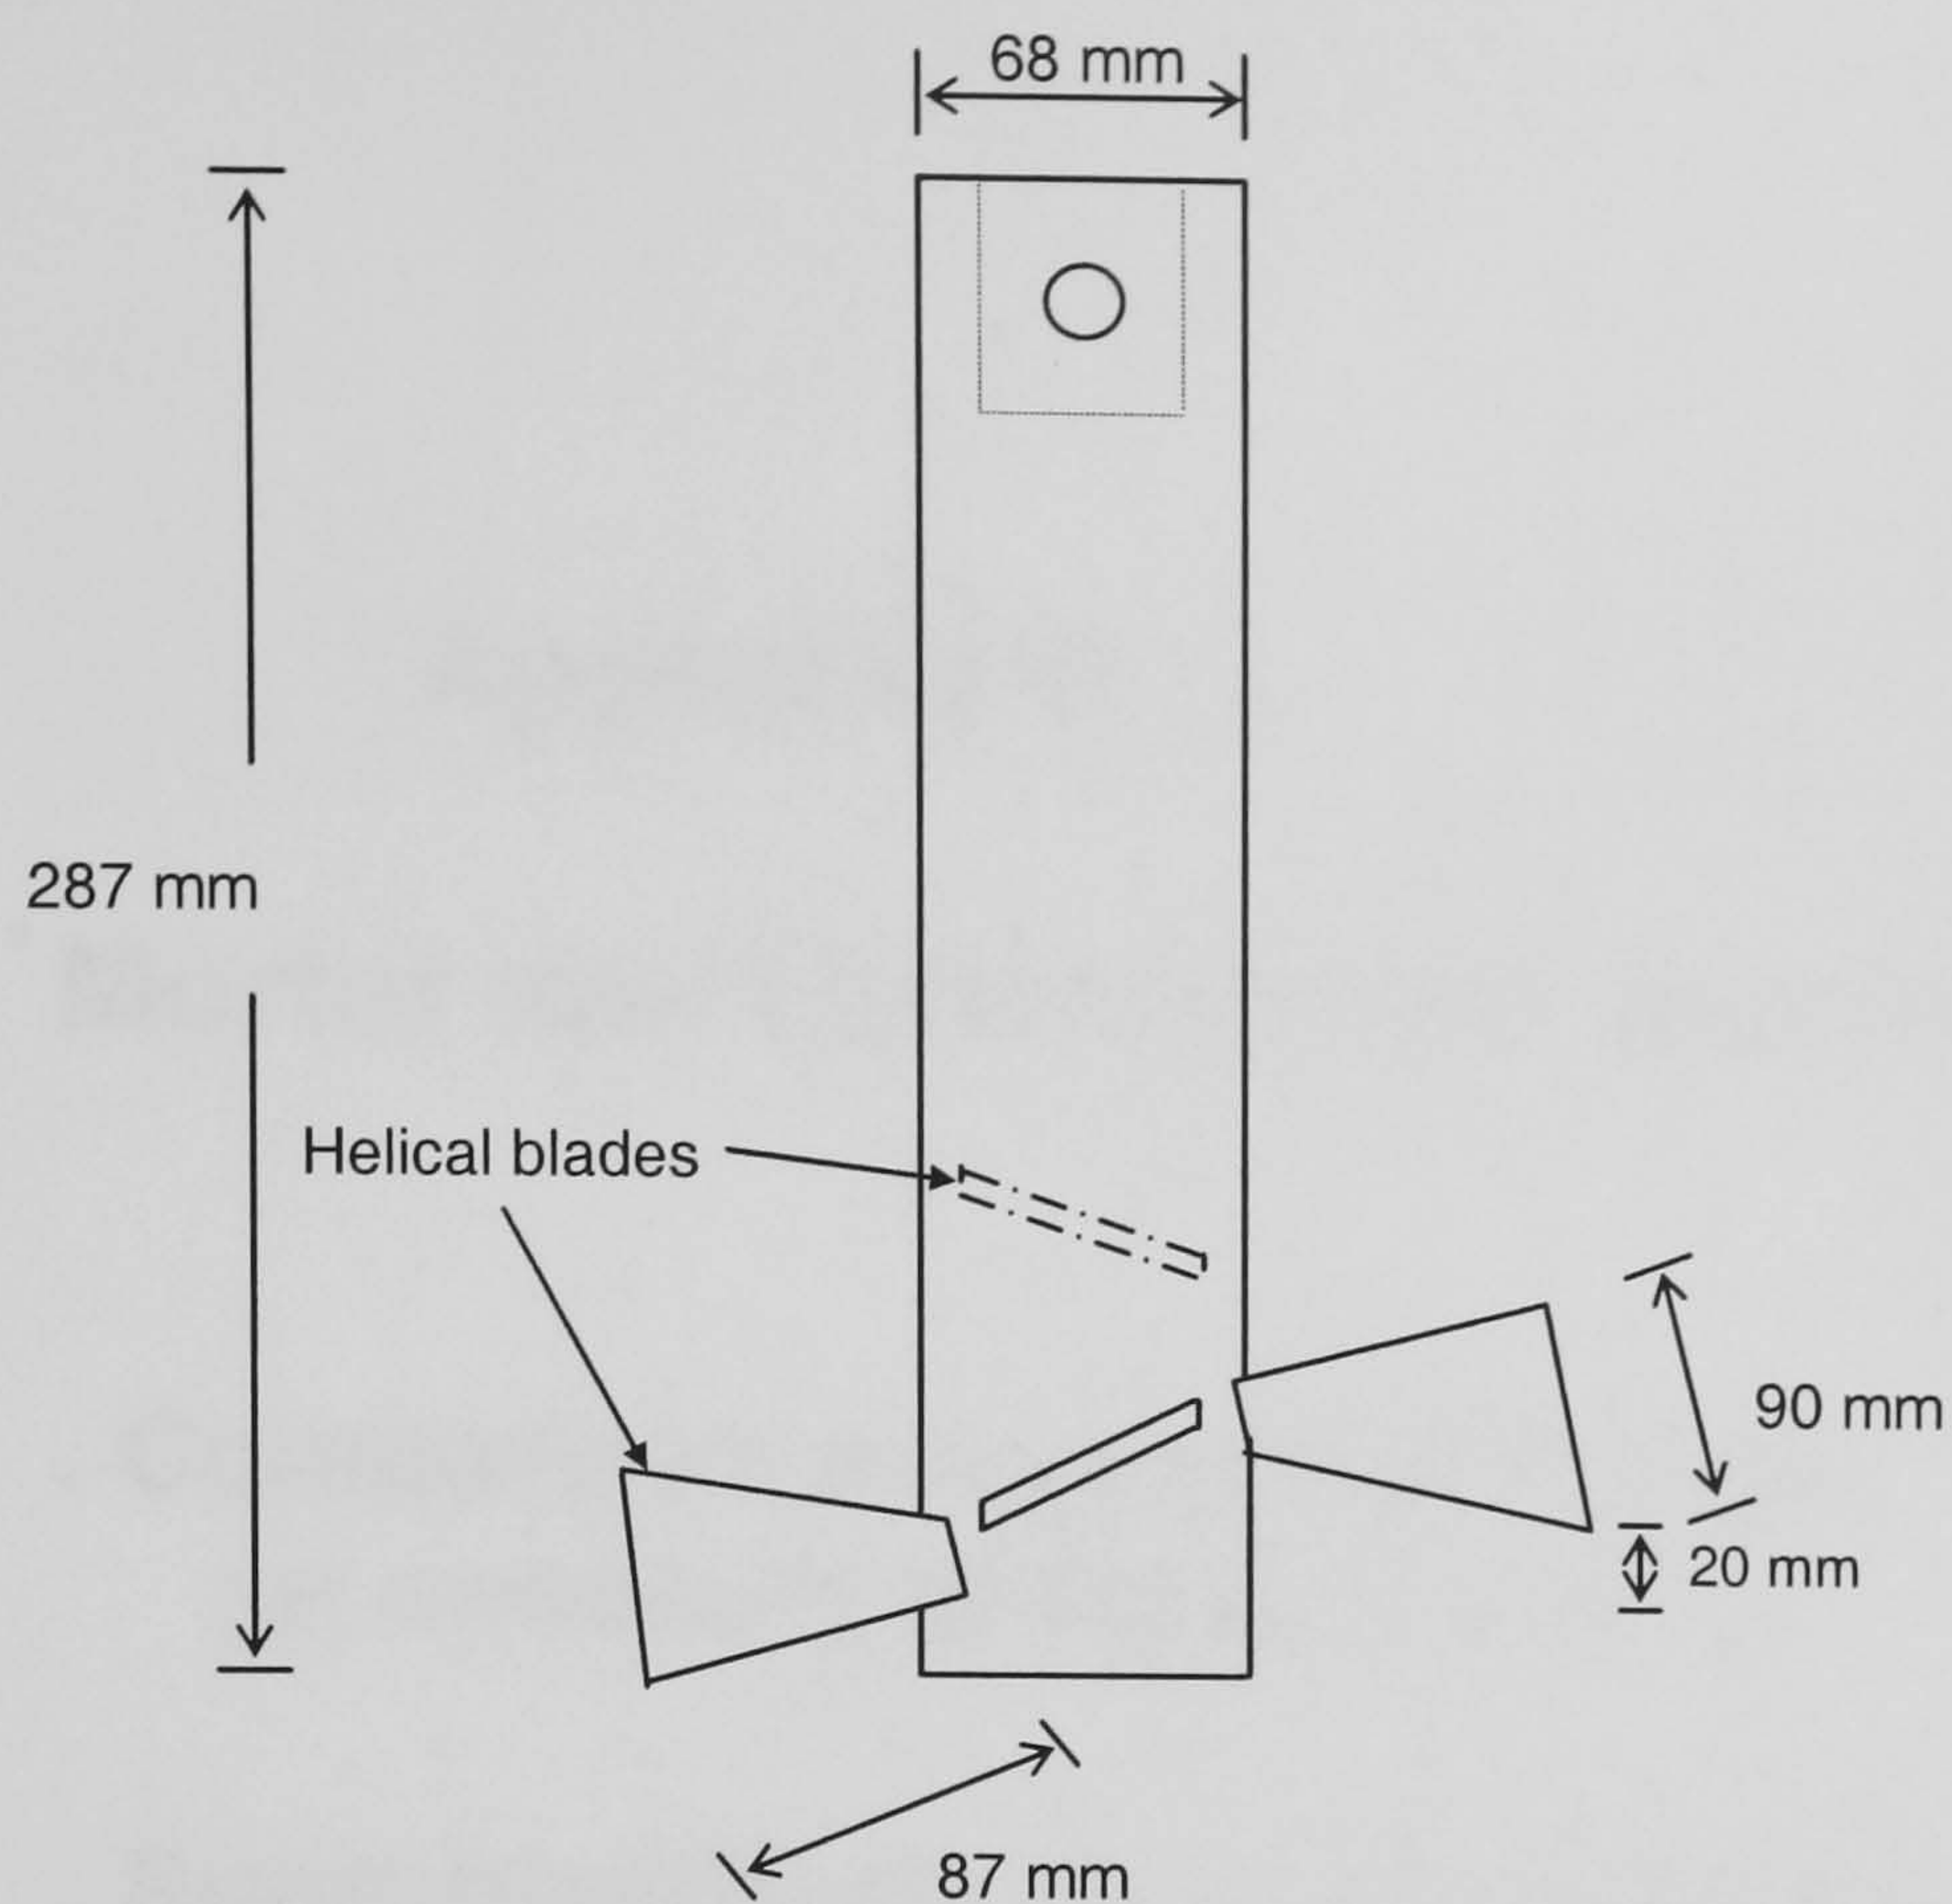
Dimensions of large helical impeller used in section 5.5.2.
